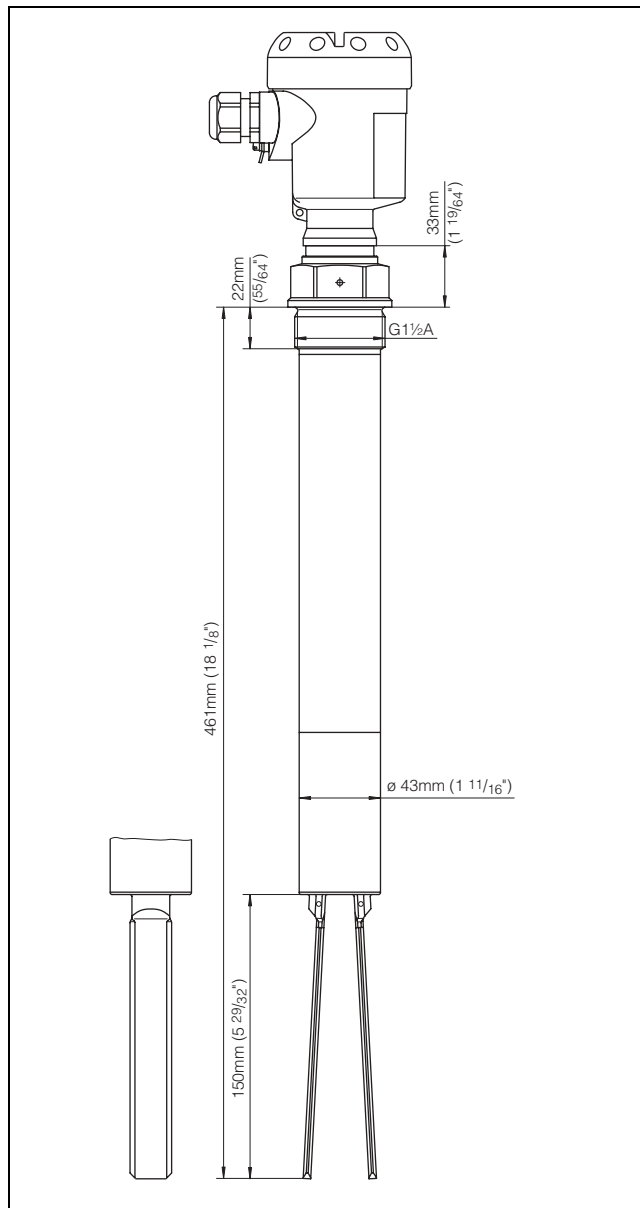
OPTISWITCH 3300 C - Screwed version G 1 1/2
